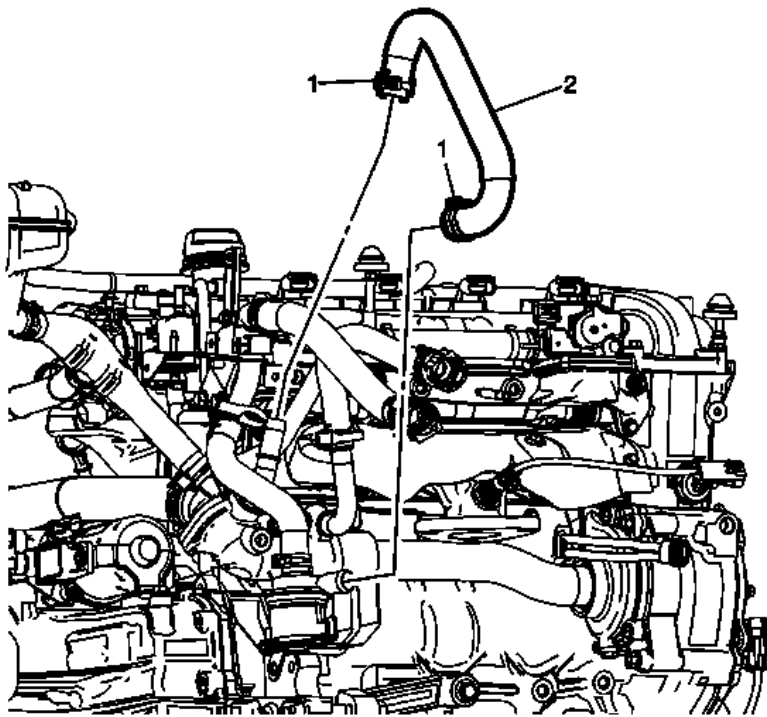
Generator Control Module Coolant Pump Hose & Clamps
